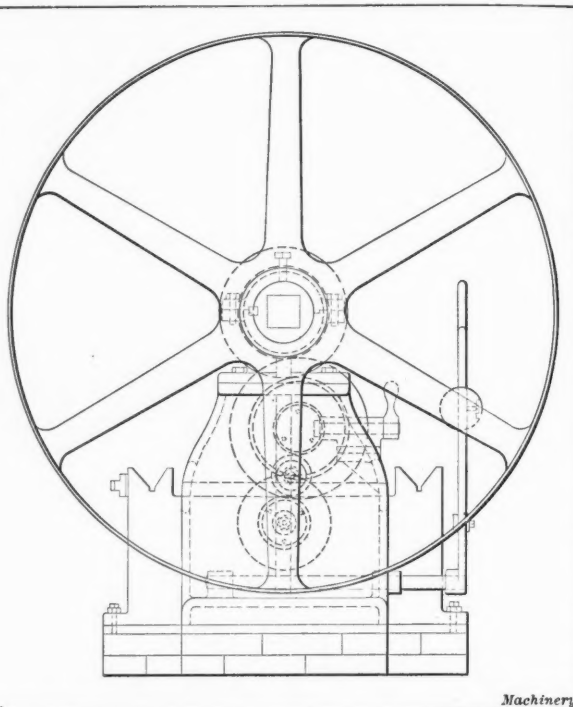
End View of Lobdell Roll Grinding Machine showing Driving Gear for Roll and Carriage
